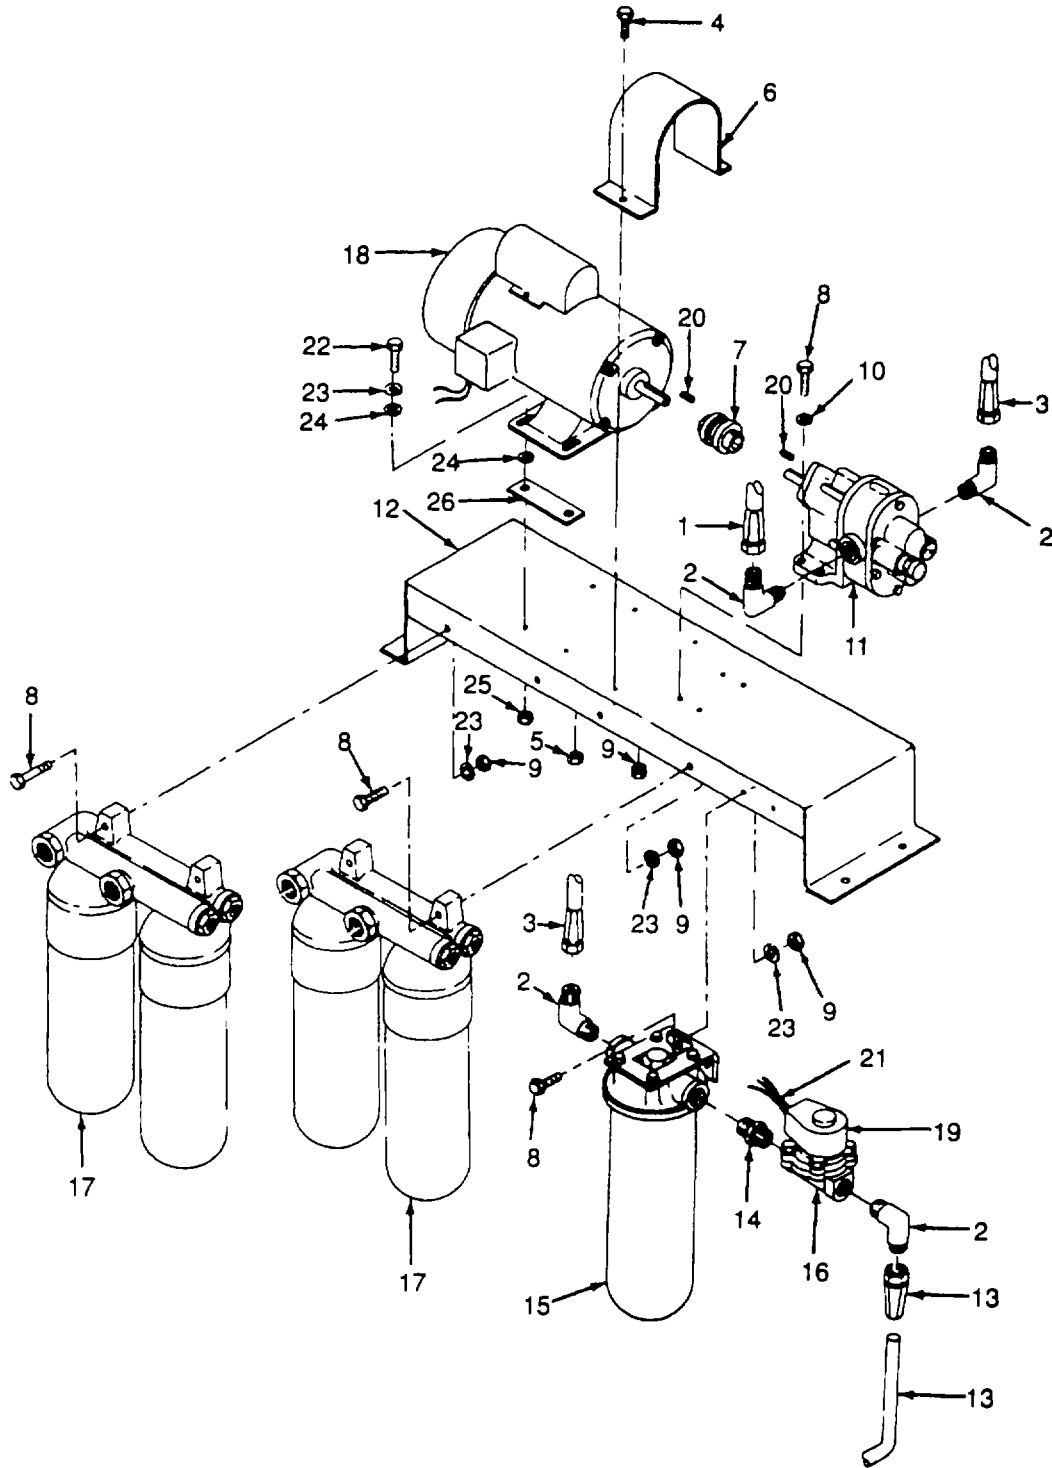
Fuel Transfer Pump and Solenoid Valve (Sheet 1 of 2)
